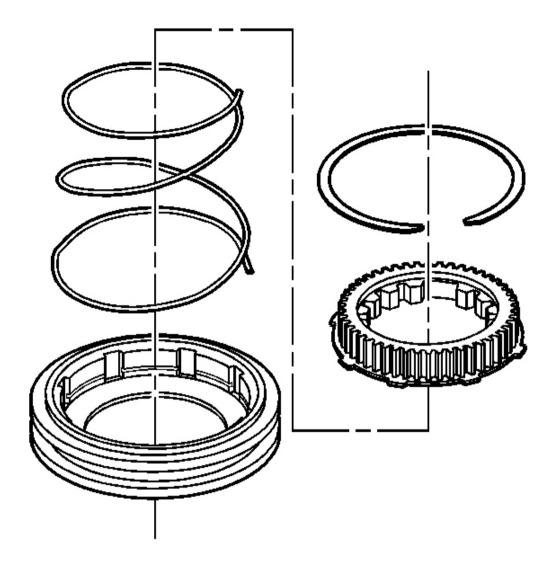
Illustrating Lockup Shift Assembly Components Courtesy of GENERAL MOTORS CORP.
